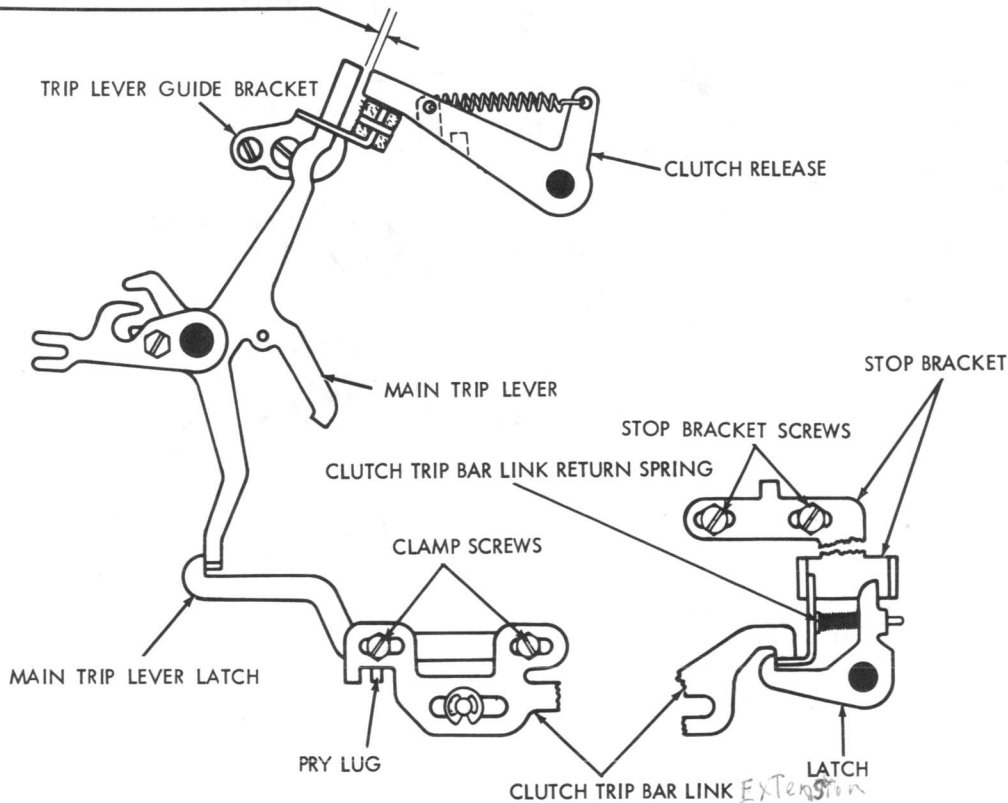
PERFORATOR CLUTCH RELEASE MECHANISM
